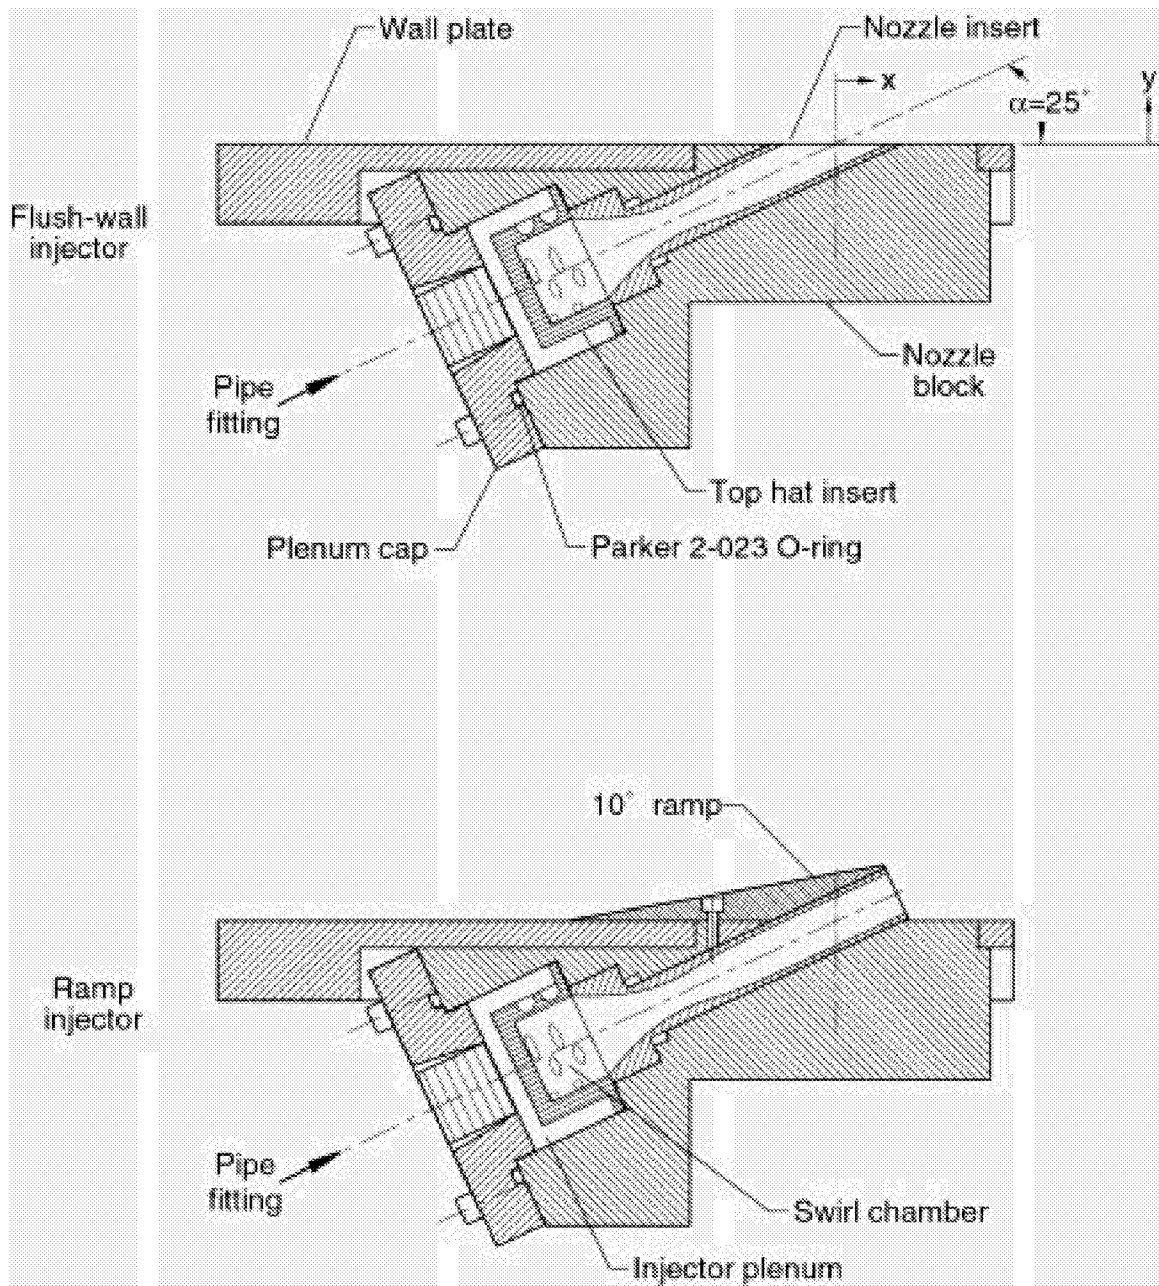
Injector assembly, cross-section view ($\beta = 0$).
